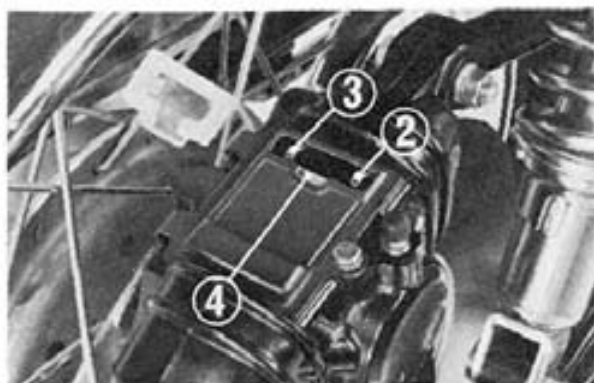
(1) Right brake pad (2) Left brake pad (3) Red mark (4) Caliper mounting bracket
